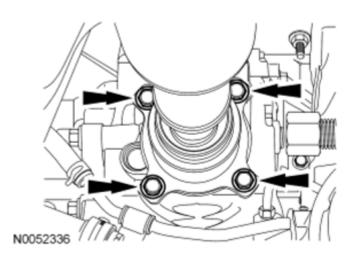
Locating Driveshaft Bolts Courtesy of FORD MOTOR CO.
